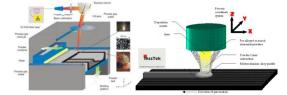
Typical additive manufacturing methods; (left) SLS, (right) DED.
